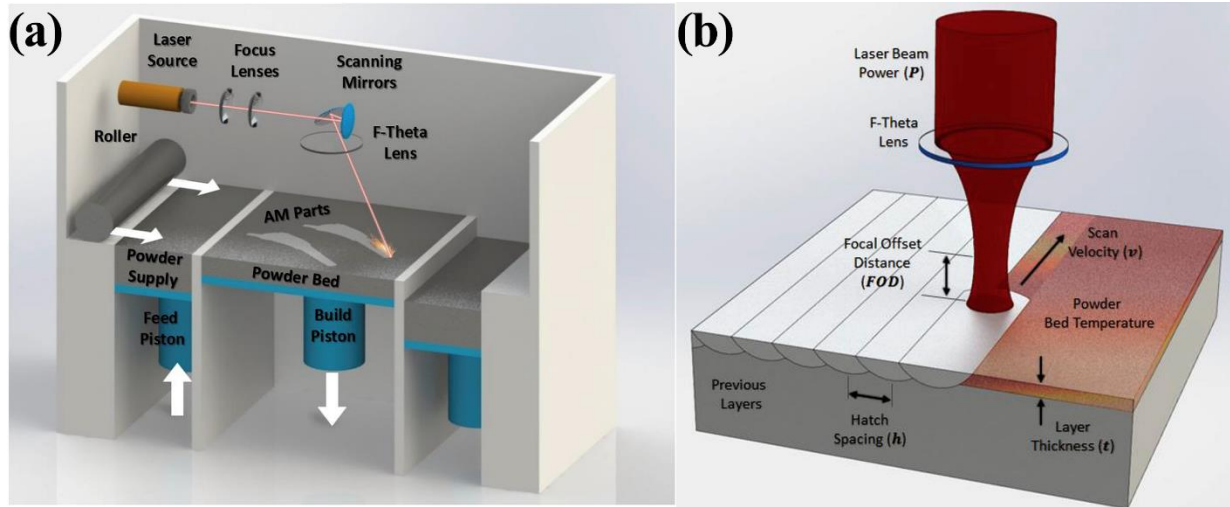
8 Schematic (a) SLM machine parts, and (b) processing parameters [48].
